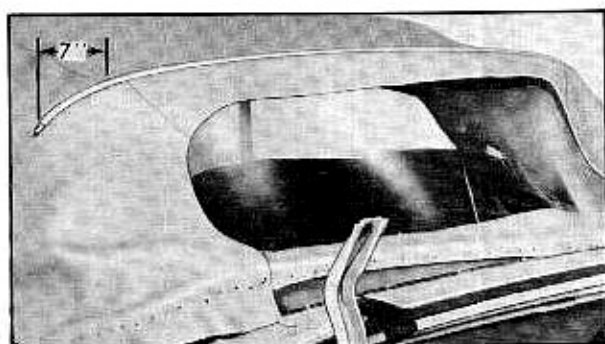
Limit of Tacking Surface-Top Material to Rear Bow
